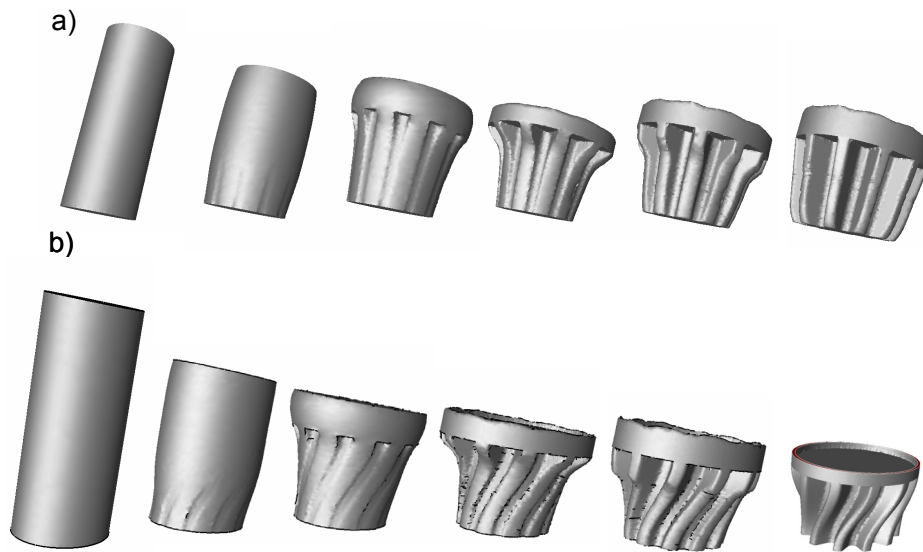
Modelling numerical of the process of forging gears wheels with a) straight and b) skew toothing
